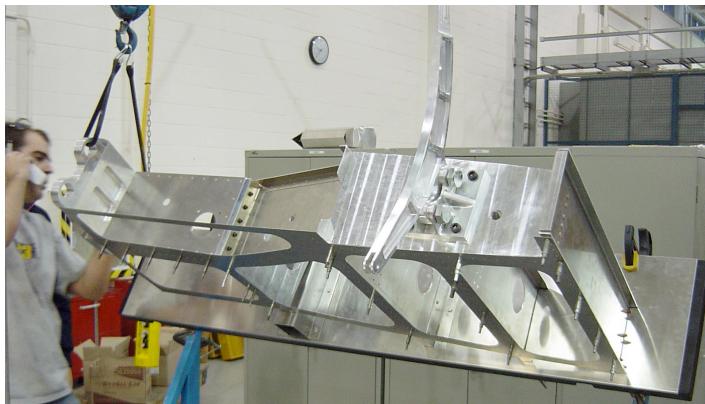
Assembly of the primary structure of the full-scale demonstration prototype.
